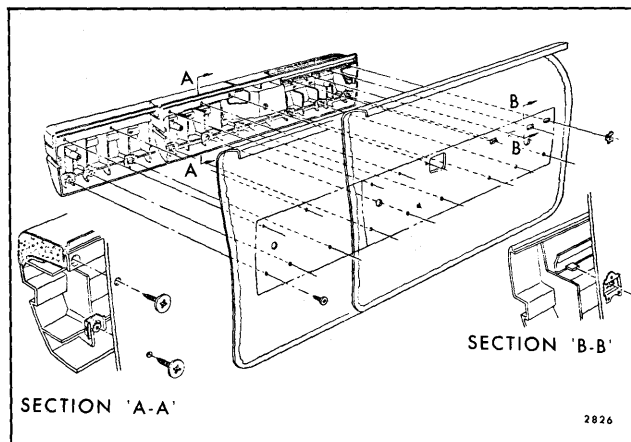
Door Arm Rest Installation - "C" and "E" Styles
